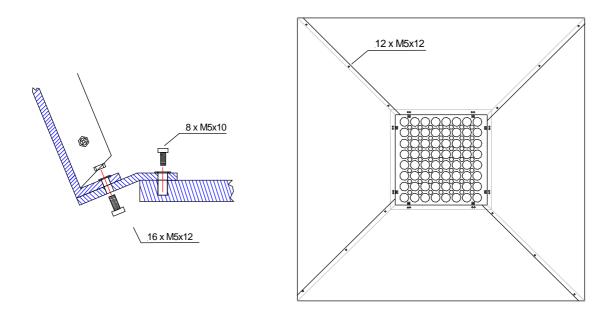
Mounting an antenna standard enclosure (Example: MFAS)
